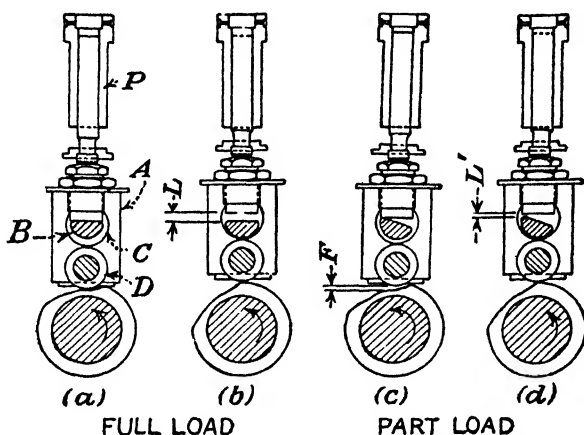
Deco variable stroke Diesel fuel-injection pump.
